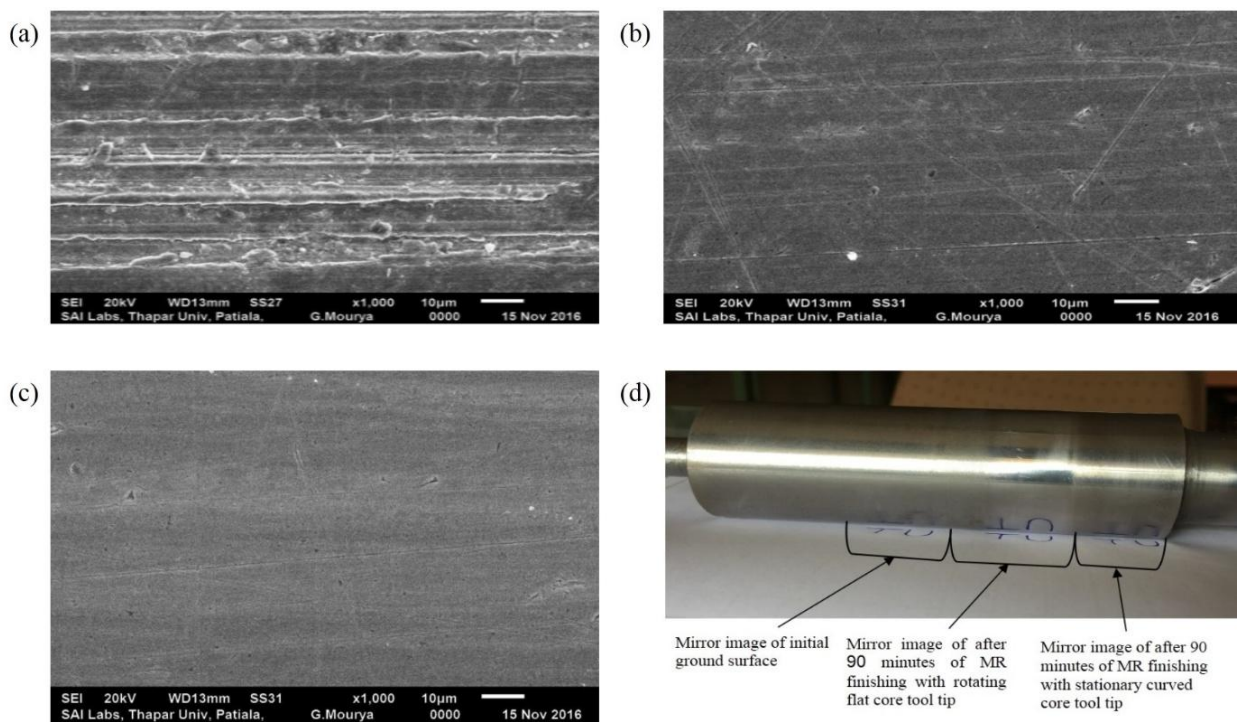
Scanning electron microscope (SEM) photographs at 1000x of external surface of cylindrical mild steel workpiece (a) initial ground surface, (b) after 90 minutes of MR finishing with stationary curved core tool tip, (c) after 90 minutes of MR finishing with rotating flat core tool tip and (d) mirror images of initial ground surface, and after 90 minutes of MR finishing with the rotating flat core tool tip and stationary curved core tool tip
